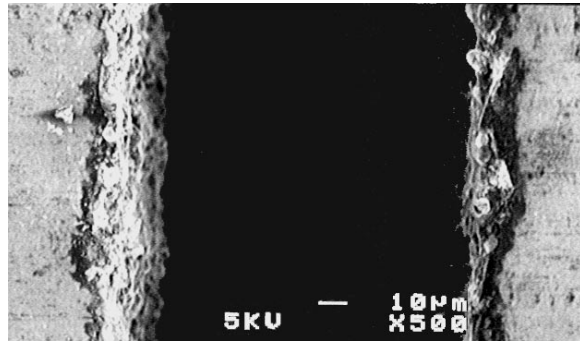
Electronic microscope inspection of one 0.7 arcsec slit manufactured by EDM.
